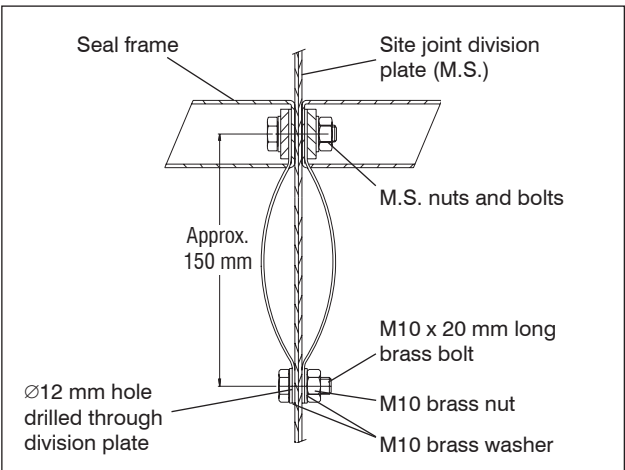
Plan view showing antistatic earthing arrangement between banked collectors
